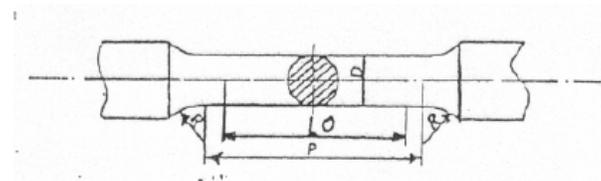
Specimen of Tensile Testing (SNI 07-0371-1998)
